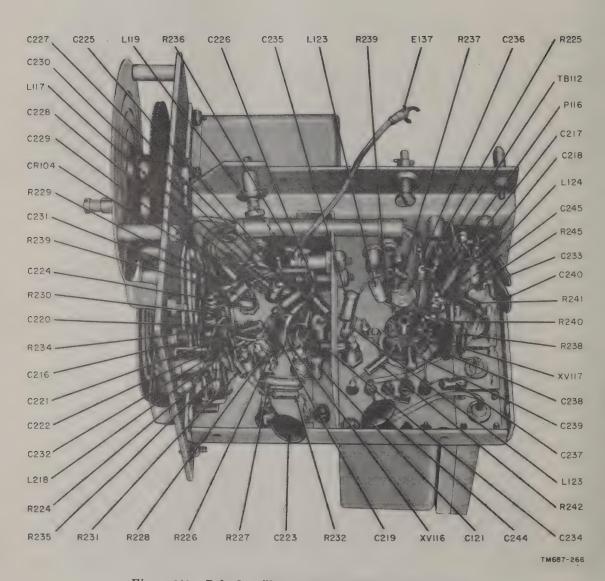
Pulsed oscillator plug-in assembly, bottom view.
